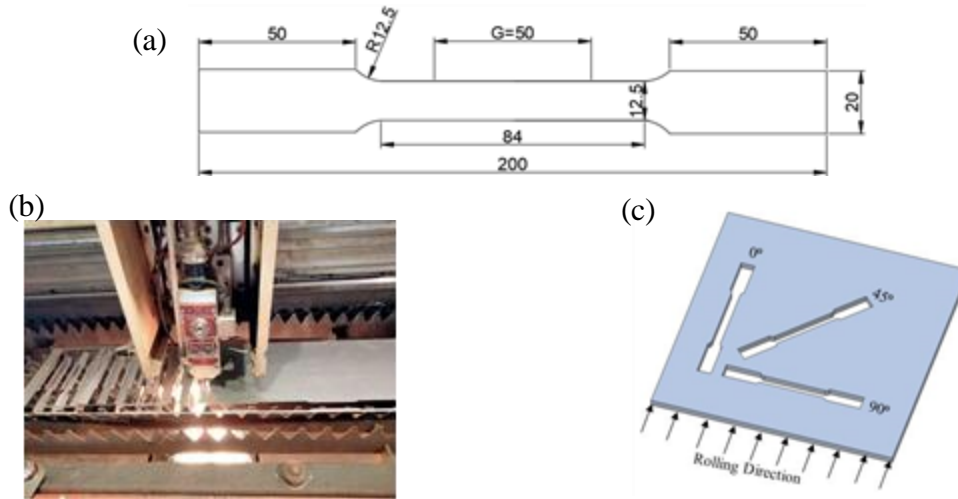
(a) Dimension of tensile specimen as per ASTM-E8M (full-size), (b) Laser cutting of full-size tensile test specimens and (c) Tensile specimen arrangement at 0°, 45°, and 90° with respect to the RD.
